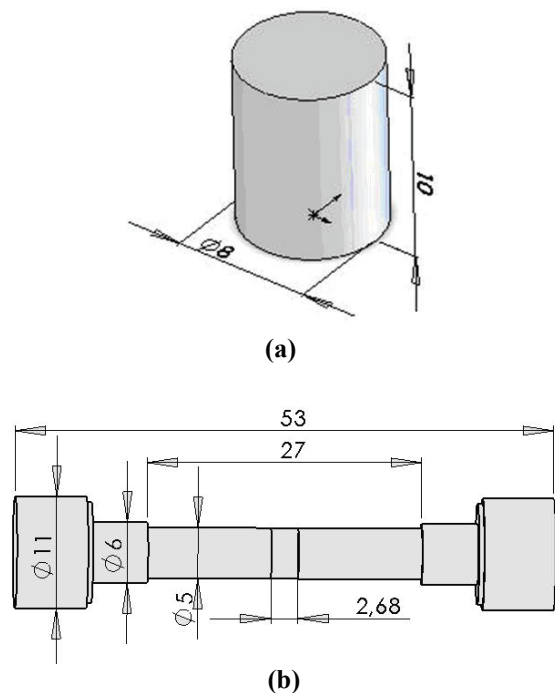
Shape and dimension of samples for upsetting test (a) and tensile test (b).
